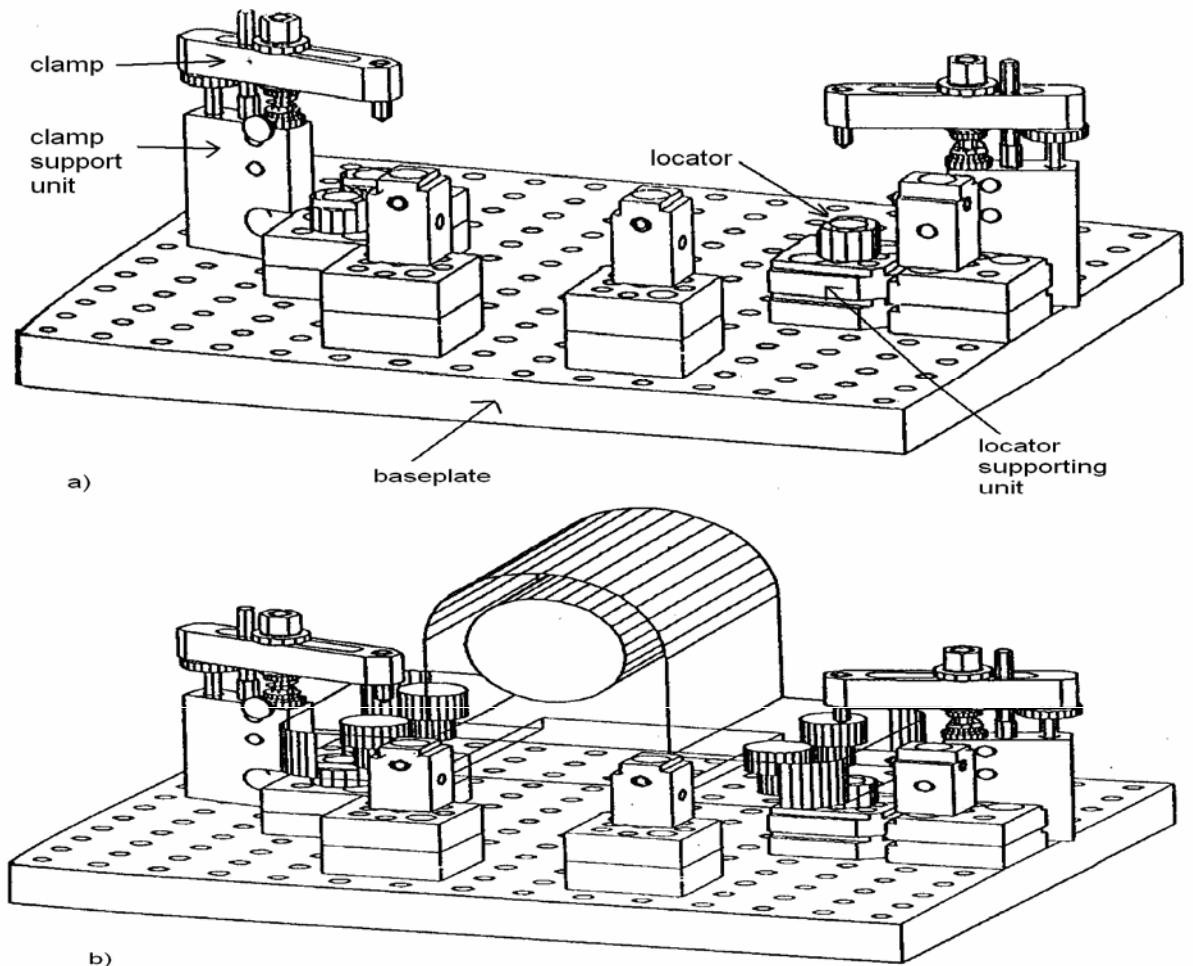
A typical modular fixture, shown a) without and b) with a workpiece (Rong, 1999)
